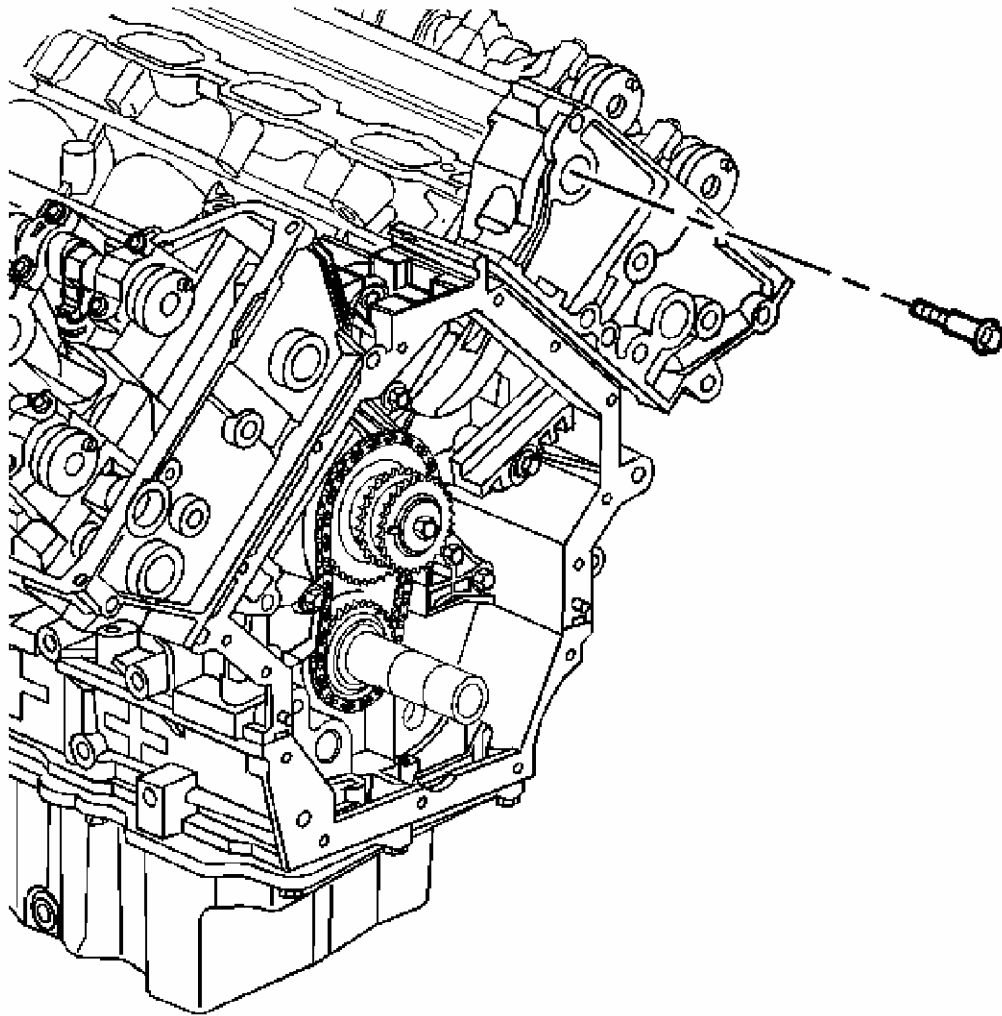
Identifying Left Secondary Camshaft Drive Chain Shoe Bolt
